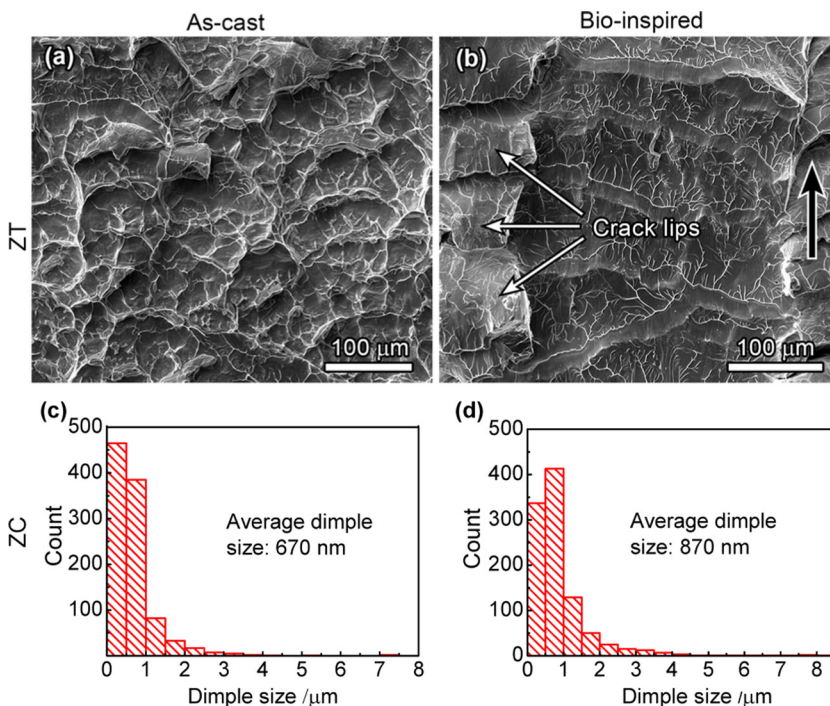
Transformation of microscopic fracture patterns on the fracture surfaces of as-cast and pre-compressed ZTs and ZCs. (a) Dimple-like features on the fracture surface of as-cast ZT. (b) Smooth and featureless shear-sliding zones, pits with viscous fingering, crack lips, and deflected cracks under crack lips present on plane strain regions of the fracture surface of ZT pre-compressed with a load of 13.5 kN. The black arrow indicates crack-propagation direction. Statistics of dimple size on fracture surface of as-cast (c) and pre-compressed (with a load of 9 kN) ZC (d). The average dimple sizes of as-cast and the pre-compressed ZC are 670 and 870 nm, respectively.
